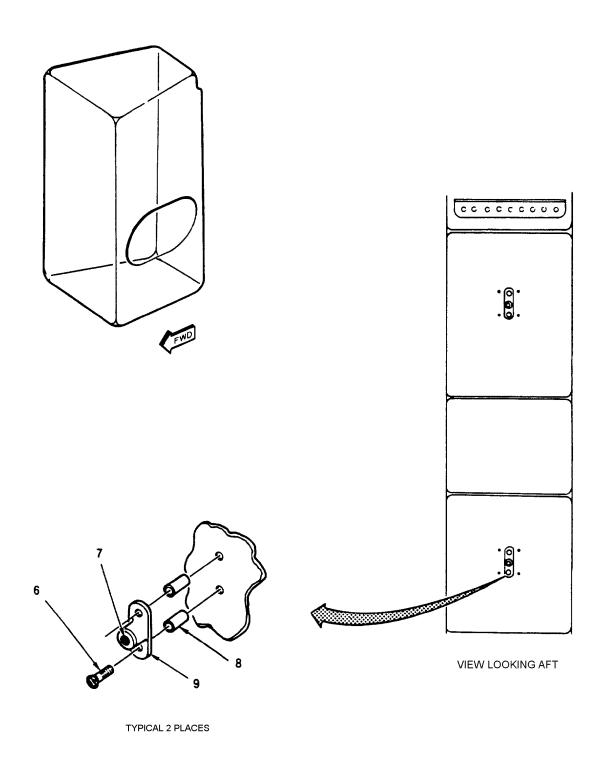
Vent Tank Cavity Bulkhead Fittings and Supports (Sheet 2)
